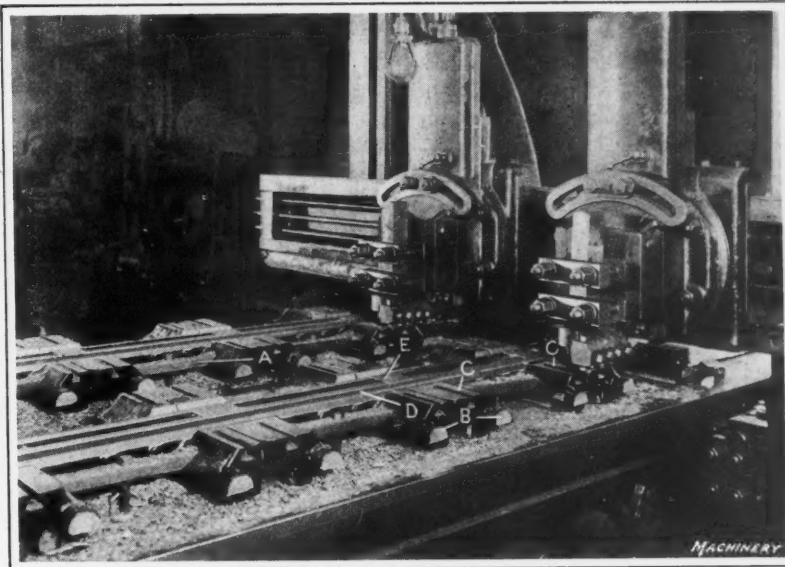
Application of Multiple-cutter Tool-holders for performing Planing Operations on Lathe Carriages
